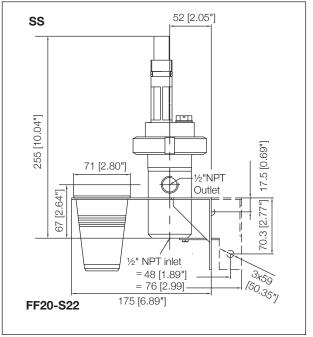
Installation example FU20-FTS/MTS in FF20-flow fitting SS
